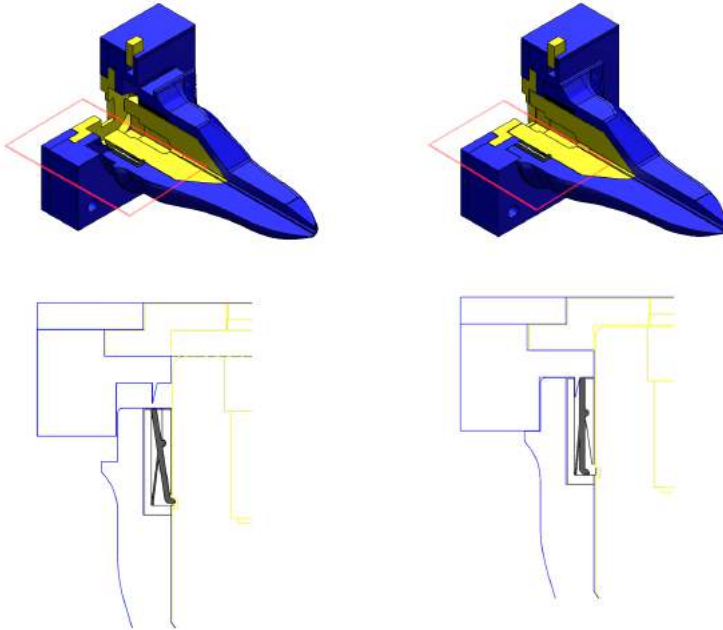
The alignment of the inner connector of prototype connector 4.
